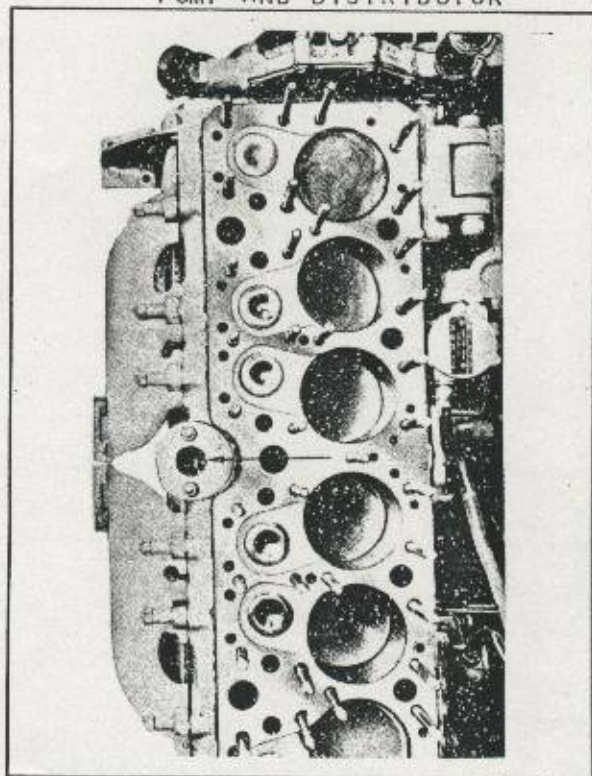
OIL PUMP REPLACEMENT - CORRECT POSITION OF DISTRIBUTOR SHAFT BLADE
